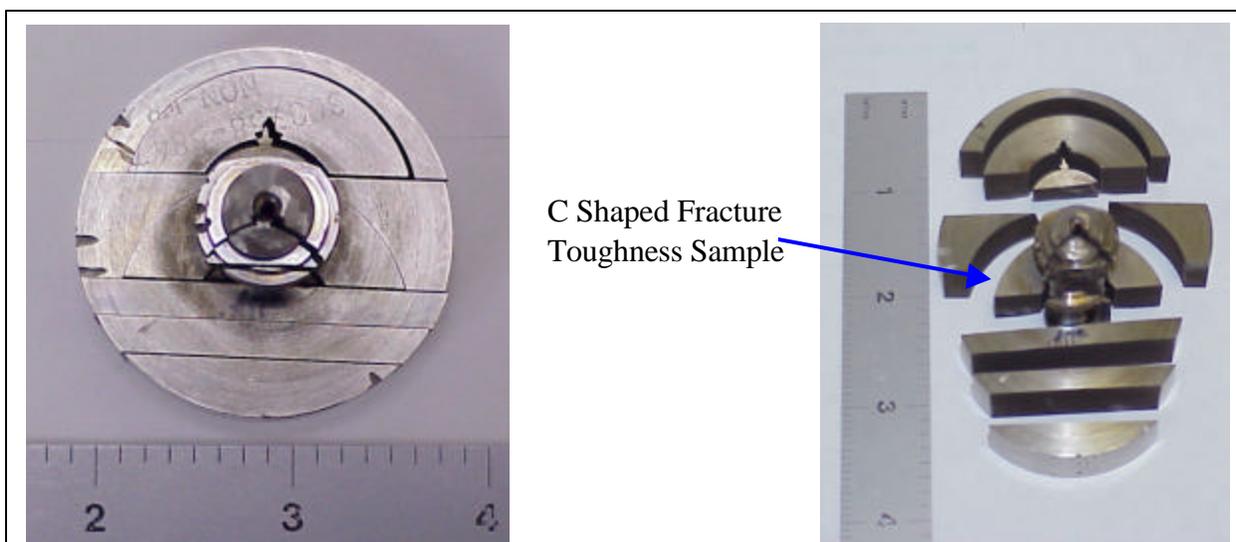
Fracture Toughness Samples Cut From Boss of Mock-Up. Some additional wire electrical discharge machining will be required to finish the fracture toughness samples.
